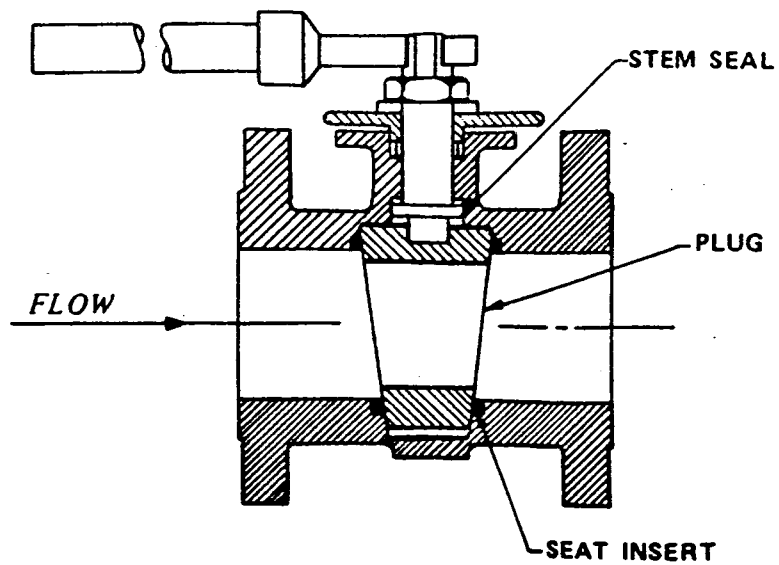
NON-LUBRICATED PLUG VALVE
